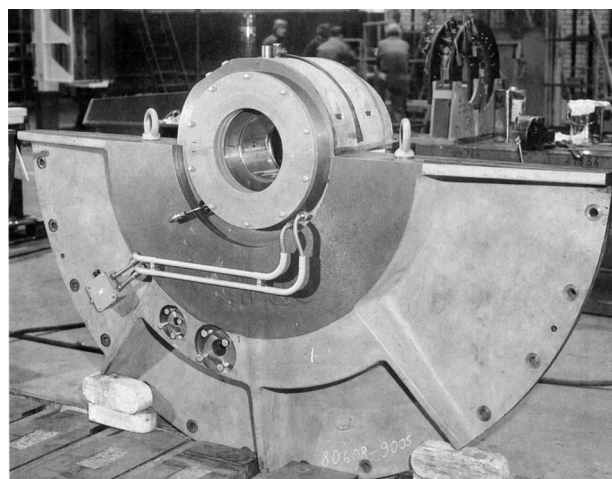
Bearing end shield. (Source: Alstom Power.)
